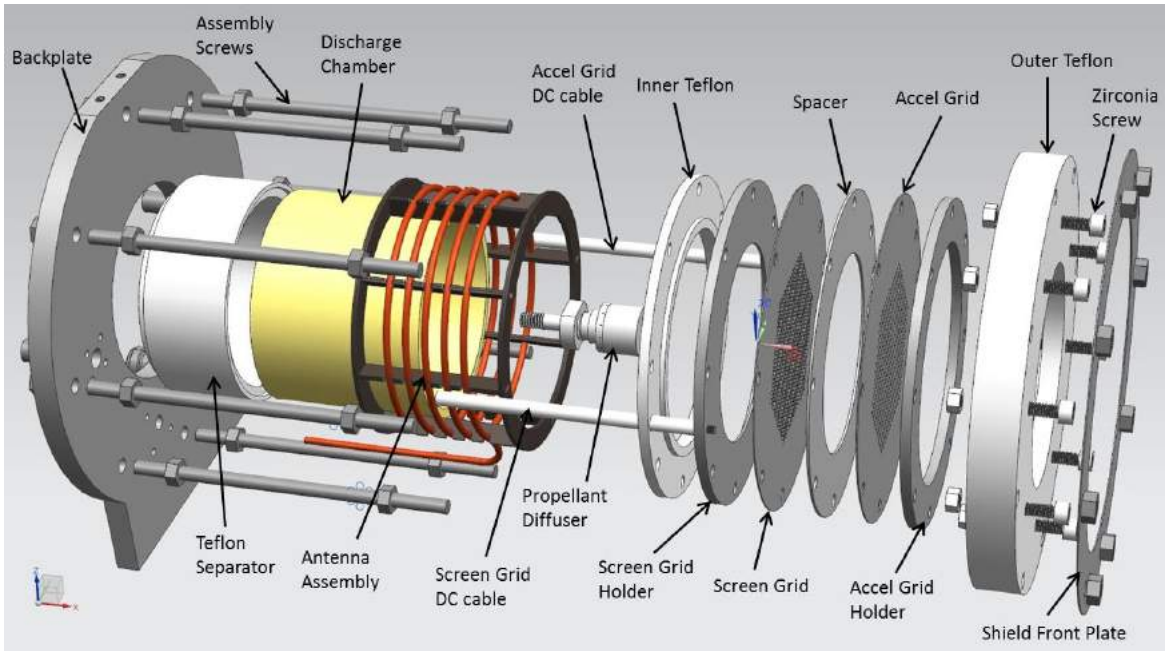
Exploded view of BURFIT-80 Ion Thruster
